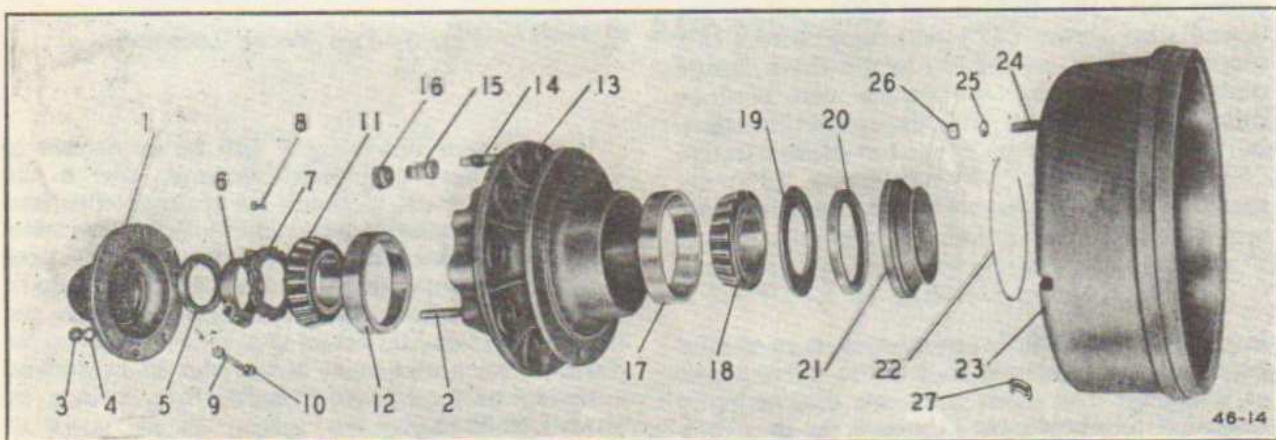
Exploded View of Rear Wheel Hub, Bearing Parts, Drive Flange and Brake Drum
